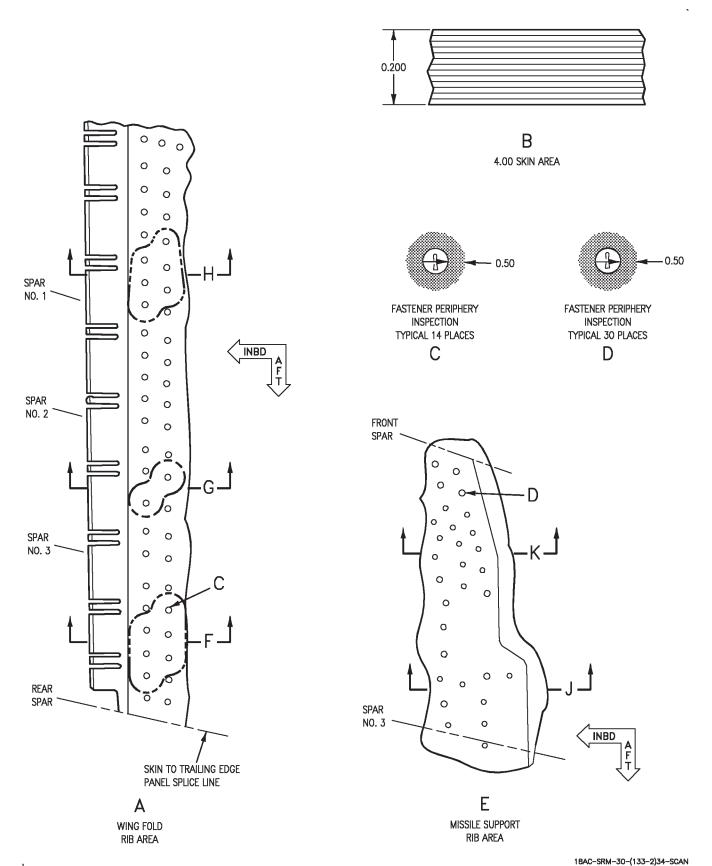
Outer Wing Lower Surface Inspection Areas (Sheet 2)
